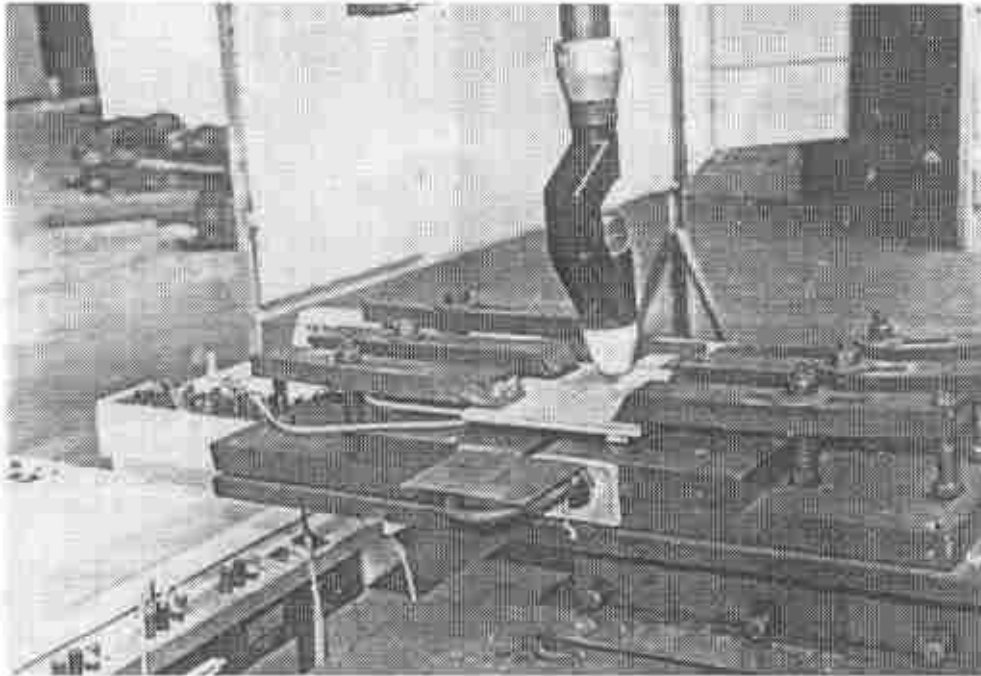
Close-up view of the welding bead and the set-up.
